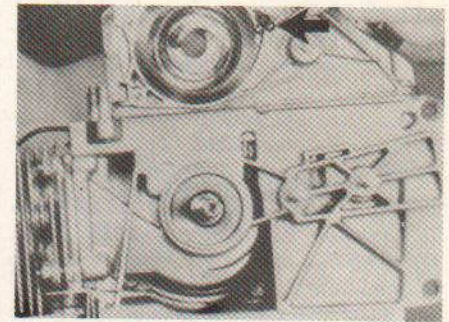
The outer end of rewind spring should be located between lugs on air box. Hooking end over outside lug may break the lug off.
